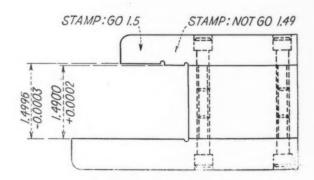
Conventional type of built-up snap gage to be used for checking the overall length of the coupling.
